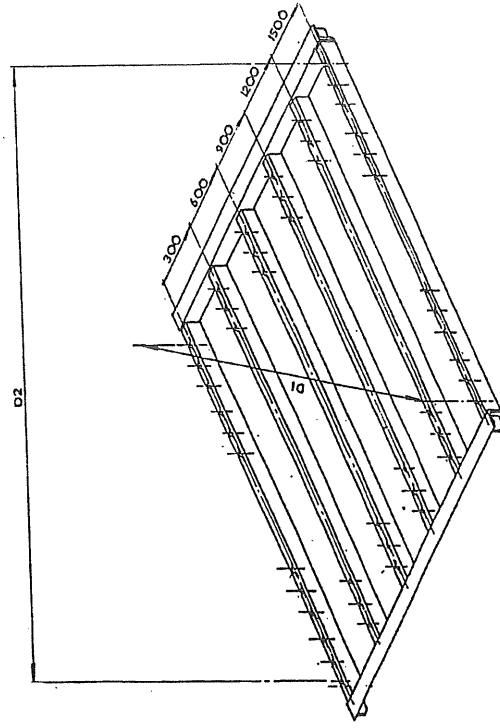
DIMENSIONAL CHECK ON FRAME OF EMITTING SYSTEM -TOP (750 MM WIDE CE PLATE)
